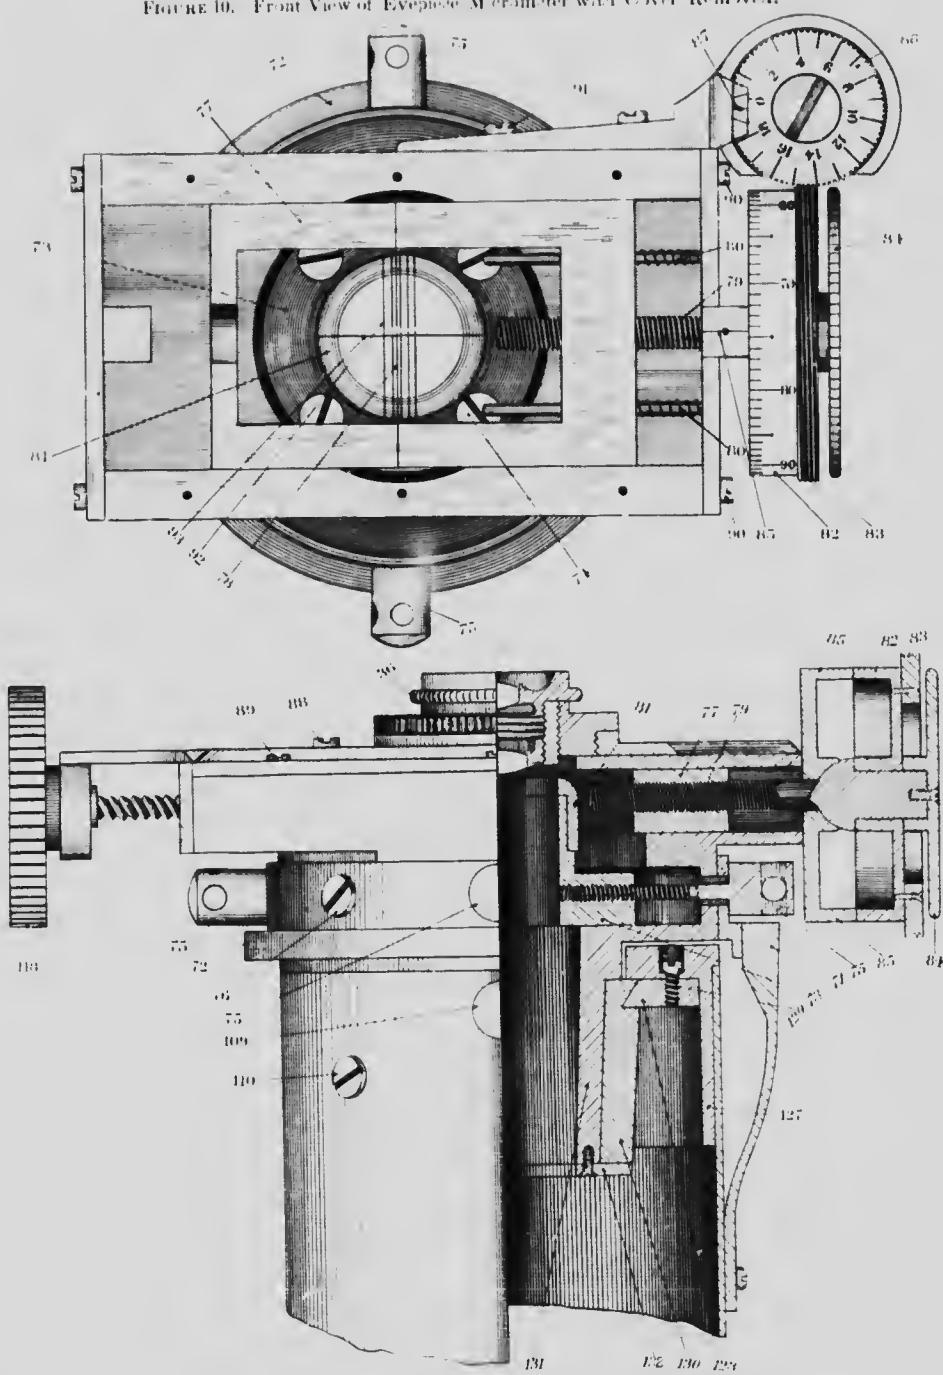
Side View and Part Section of Eyepiece Micrometer.
